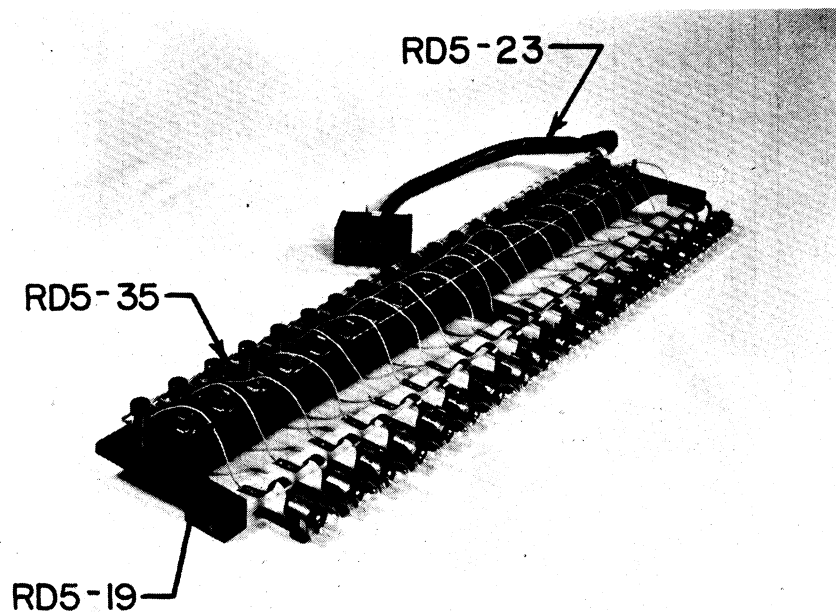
Bottom view of the G-6 lamp holder for the impact tester.
